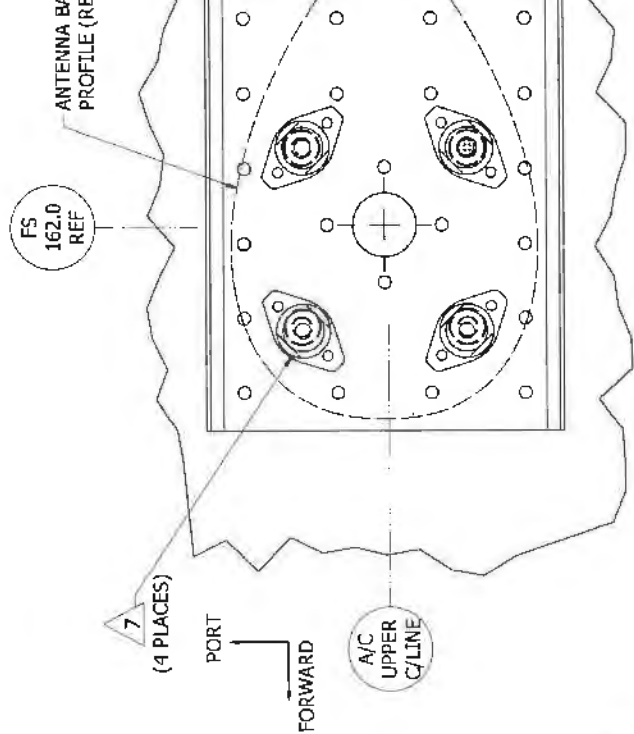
VIEW LOOKING UP AT INSTALLATION
